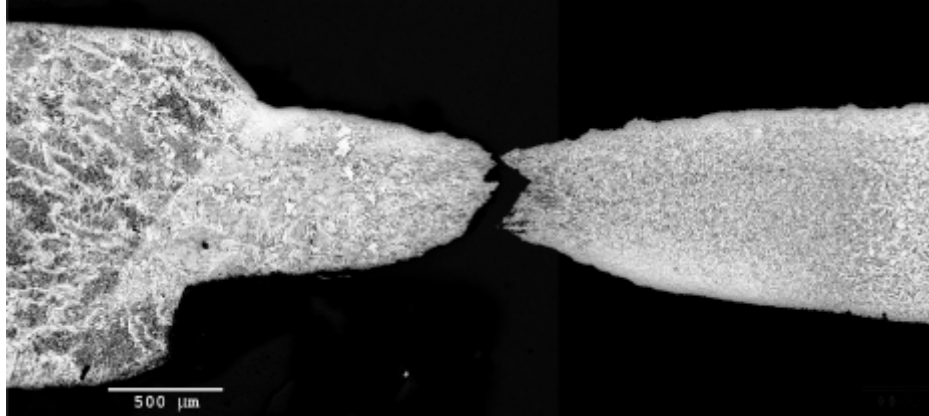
Metallographic cross section of tear #2-1. Tearing occurred in heat affected zone adjacent to repair weld. Note how grinding ends abruptly at edge of fusion zone, providing for measurement of as-ground liner thickness at edge of weld and close to location of tear. Tearing occurred in the adjacent heat affected zone.
